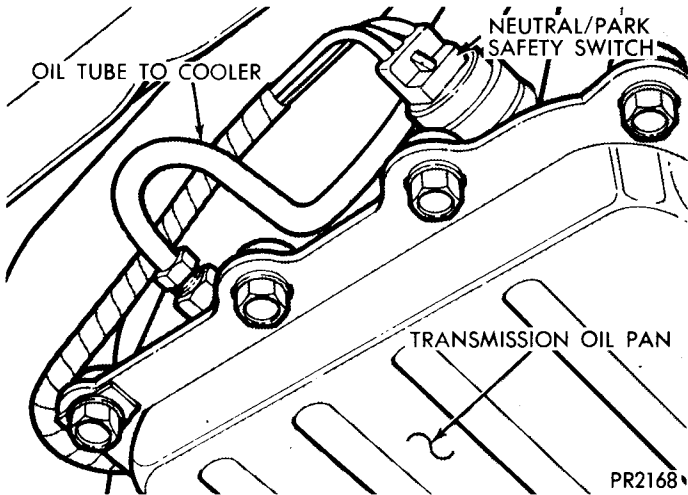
Remove or Install Lower Cooler Tube and Wire to Neutral/Park Safety Switch
